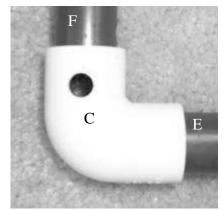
Assembly of the Small Wheelchair (Step 11).
